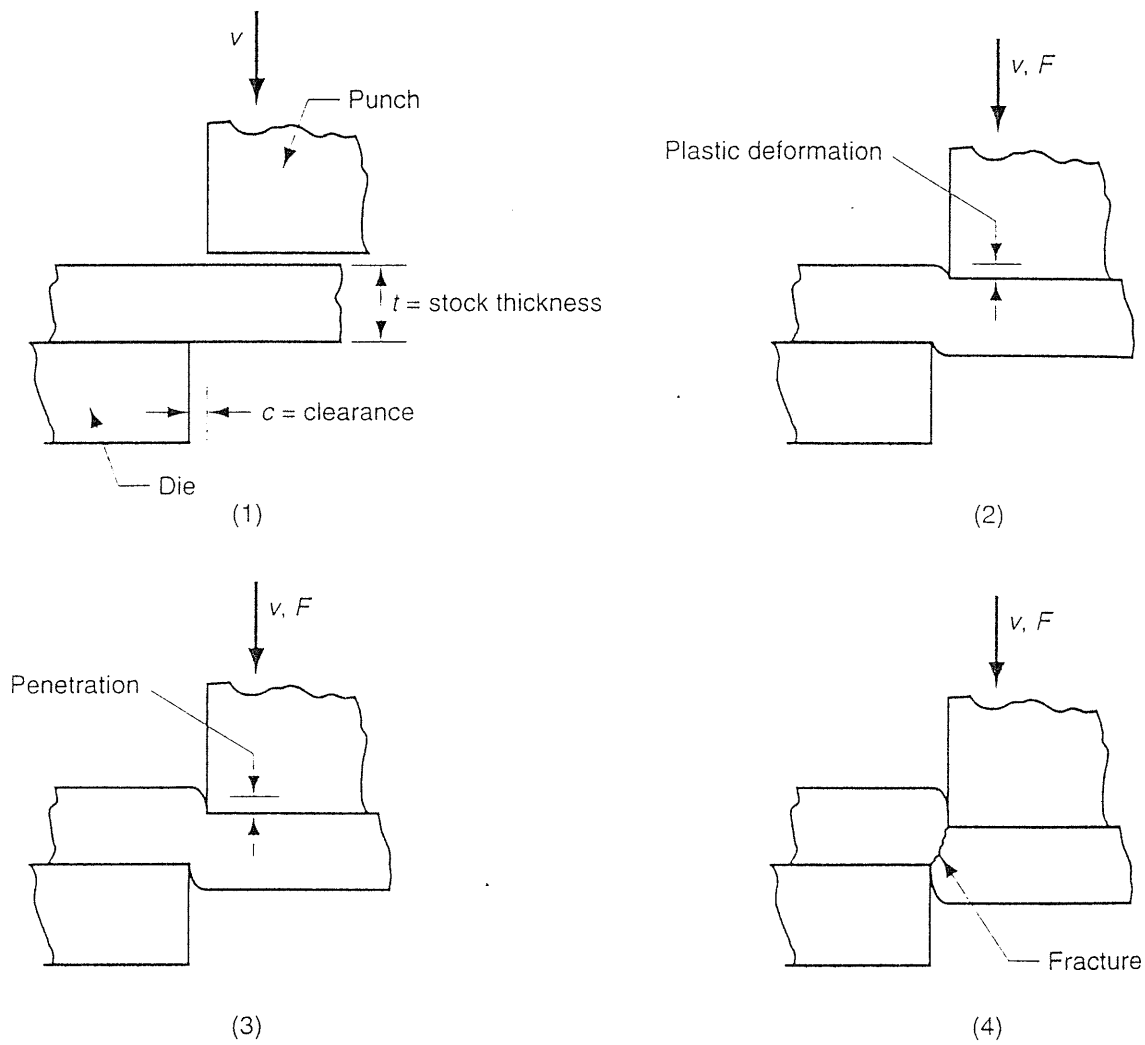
Shearing of sheet metal between two cutting edges: (1) just before the punch contacts work; (2) punch begins to push into work, causing plastic deformation; (3) punch compresses and penetrates into work, causing a smooth cut surface; and (4) fracture is initiated at the opposing cutting edges that separate the sheet. Symbols *v* and *F* indicate motion and applied force, respectively.
